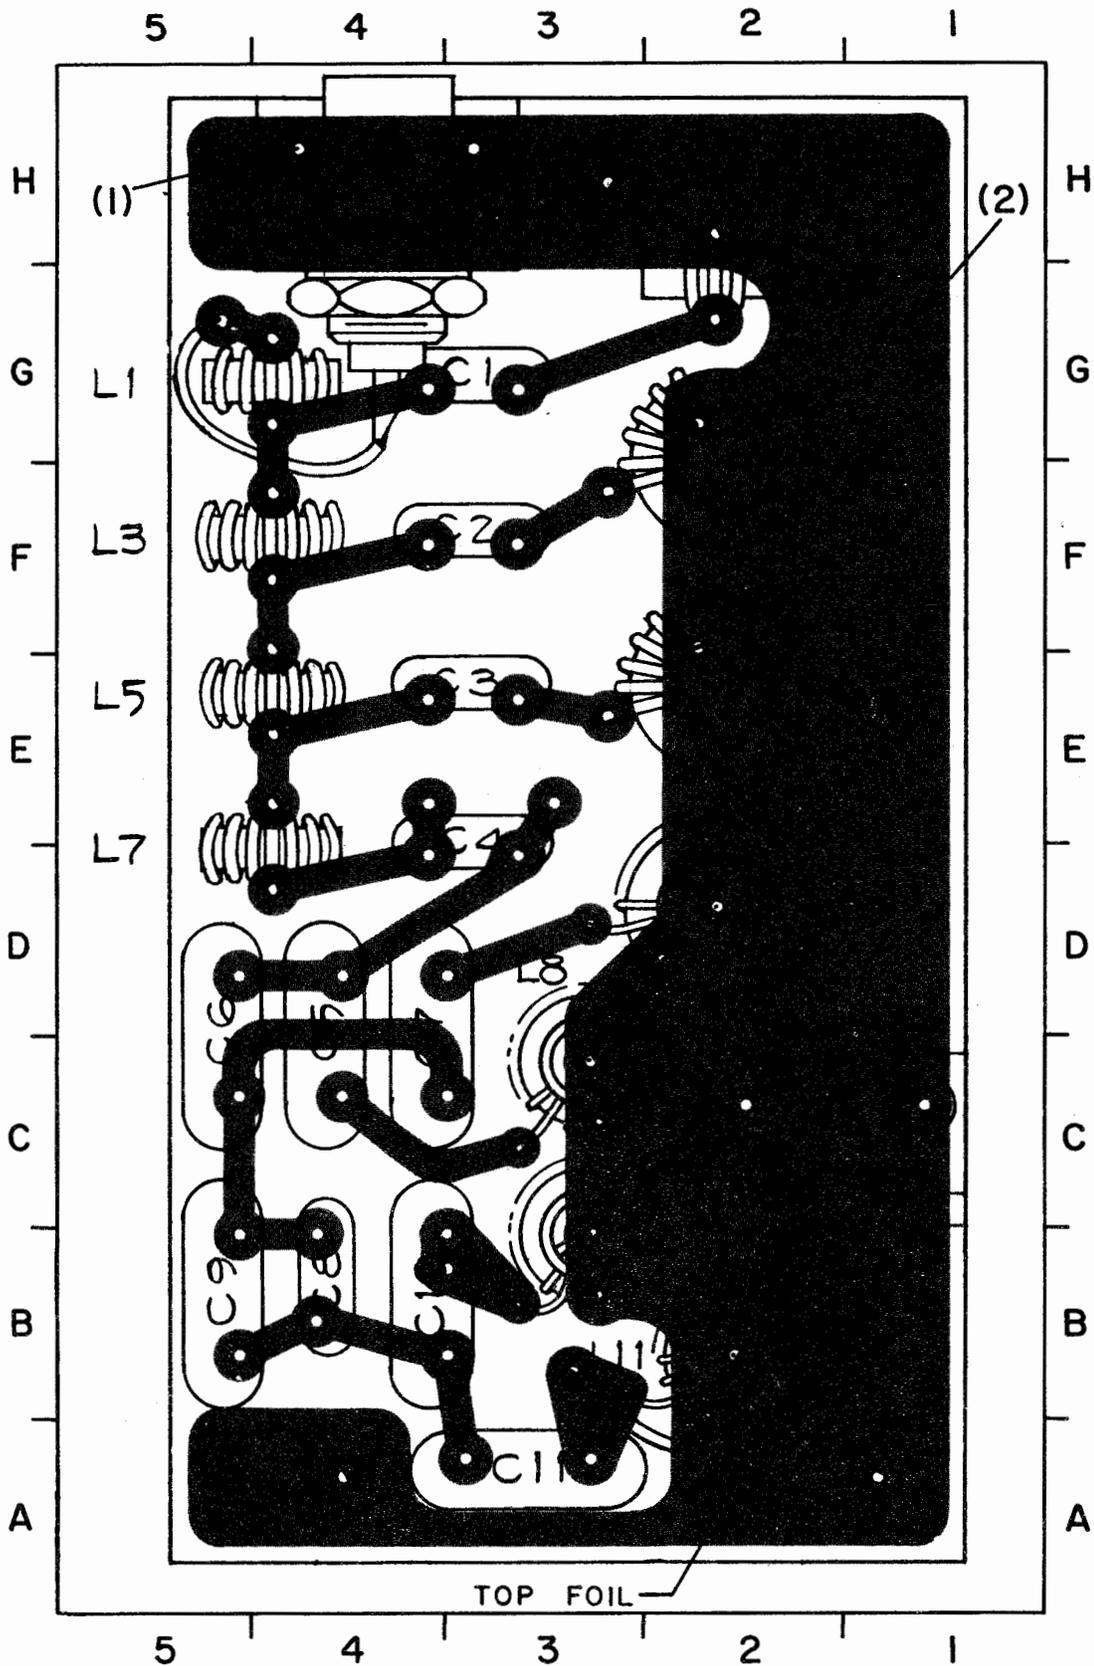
RF Filter 1A1, 34-0121, Parts Location (Top View) (Sheet 1 of 2)
